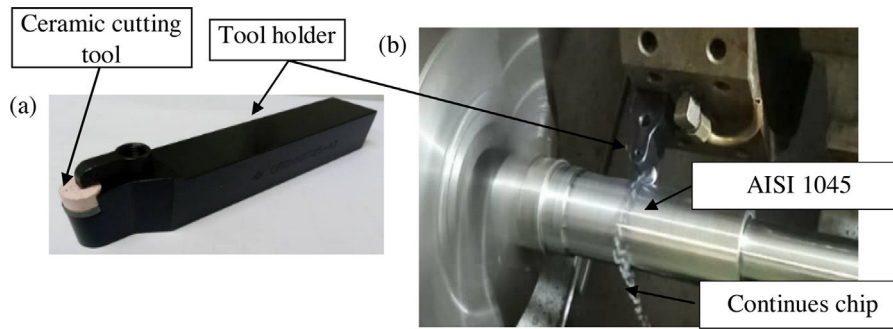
Machine tool (a) tool holder with ceramic cutting tool and (b) machining trial for the fabricated cutting tool.
